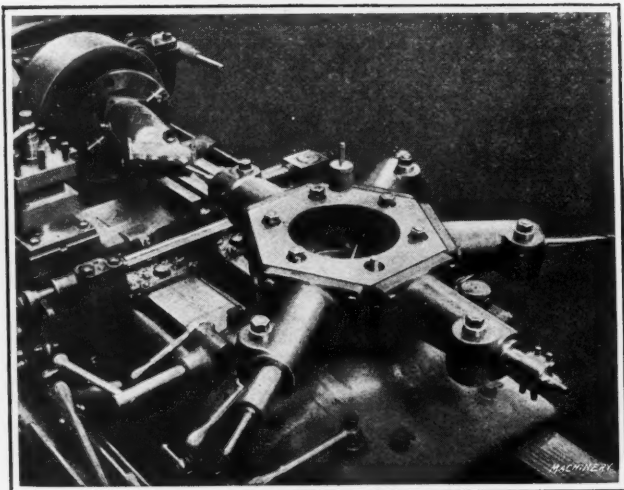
Set-up of Tooling Equipment and Work on Machine employed in machining the Valve Guide Holes in the Airplane Engine Cylinder
